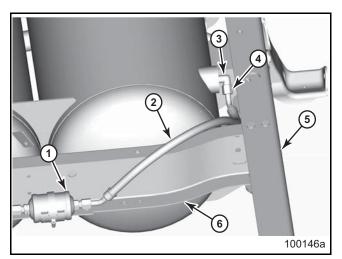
Fuel Fill Line at Fuel Fill Valve Assembly
